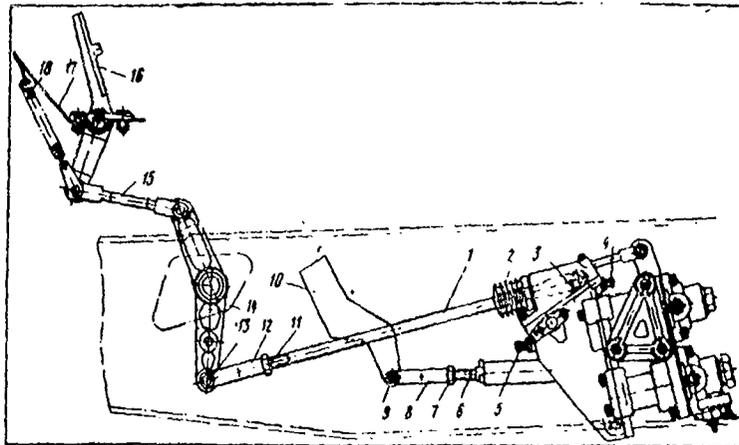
ZIL-130 Brake Valve Drive System: 1, tension member of brake pedal; 2, boot; 3, lever; 4 and 5, adjusting screw; 6, manual valve drive tension member for trailer; 7 and 11, counter nuts; 8 and 12, forks; 9 and 13, pins; 10, hand brake drive lever; 14, intermediate lever; 15, pedal arm; 16, brake pedal; 17, cabin floor; 18, return spring
